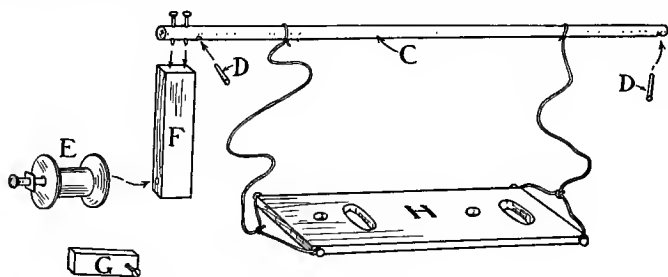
Detail of Drum and Crank for Lifting Battery Elements.
